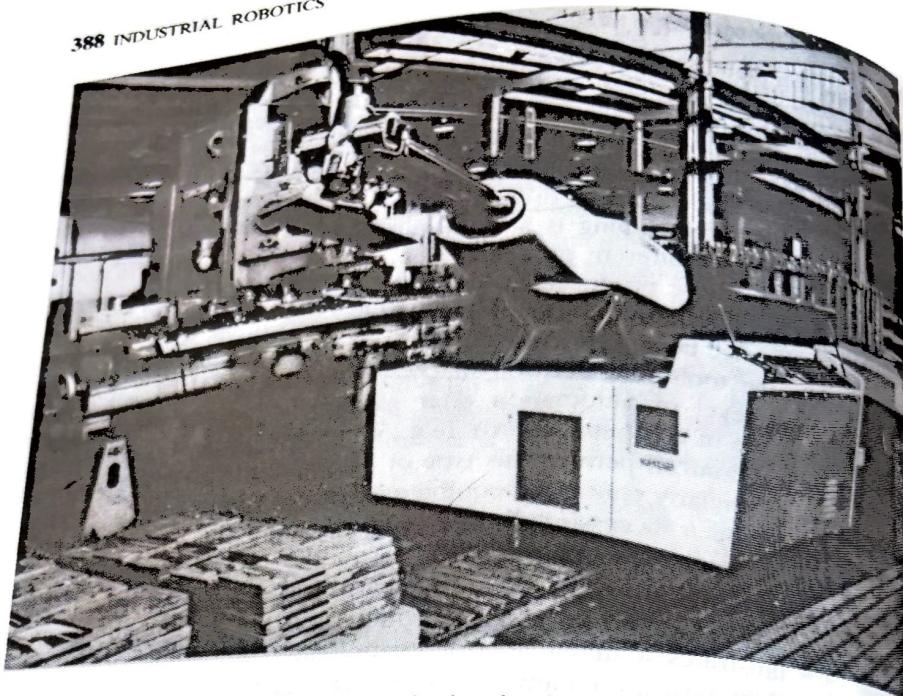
Unimate 2000 robot used to load and unload parts in a machine tool operation.
